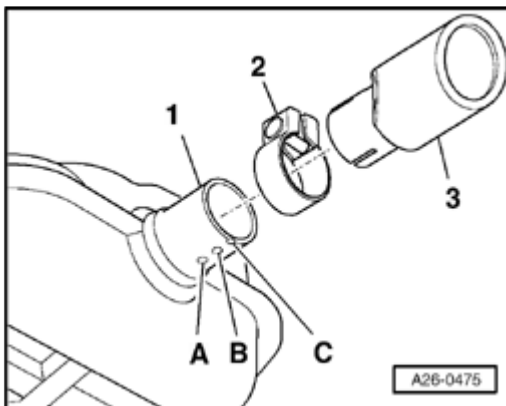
Identifying End Pipes, Separating Point, Markings & Clamps
